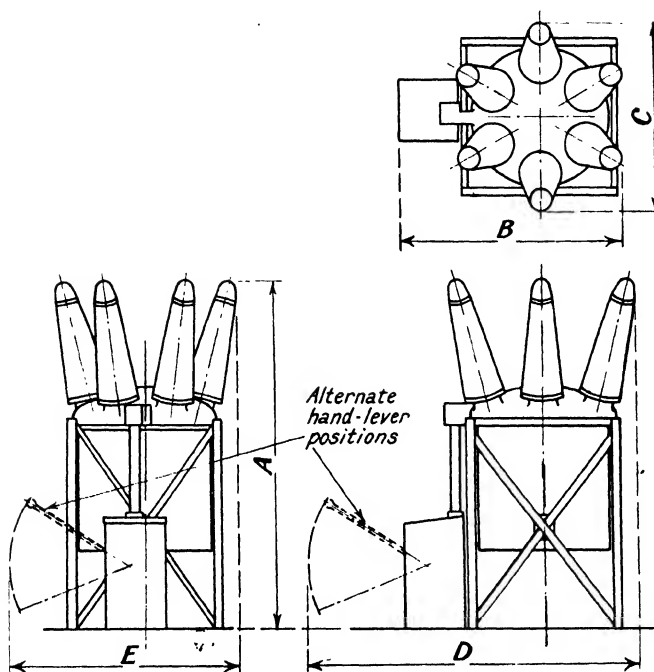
OUTLINE OF FRAME MOUNTING OIL CIRCUIT-BREAKER
